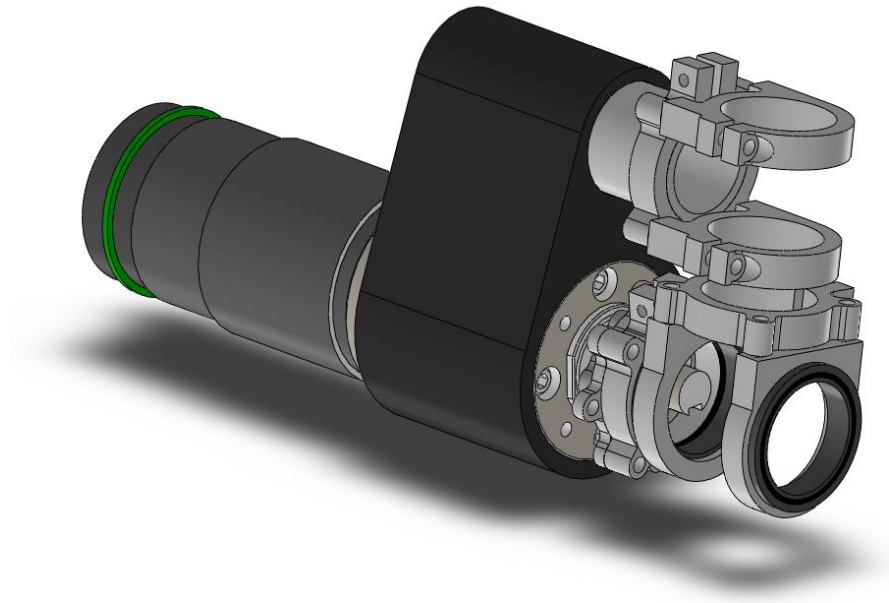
A single motor assembly. The arm shaft would extend vertically. The motor is held stationary relative to the arm by the black 3D-printed clamping hub. The motor's rotor is connected to the central shaft, which is in turn connected to the other elbow motor's rotor.
